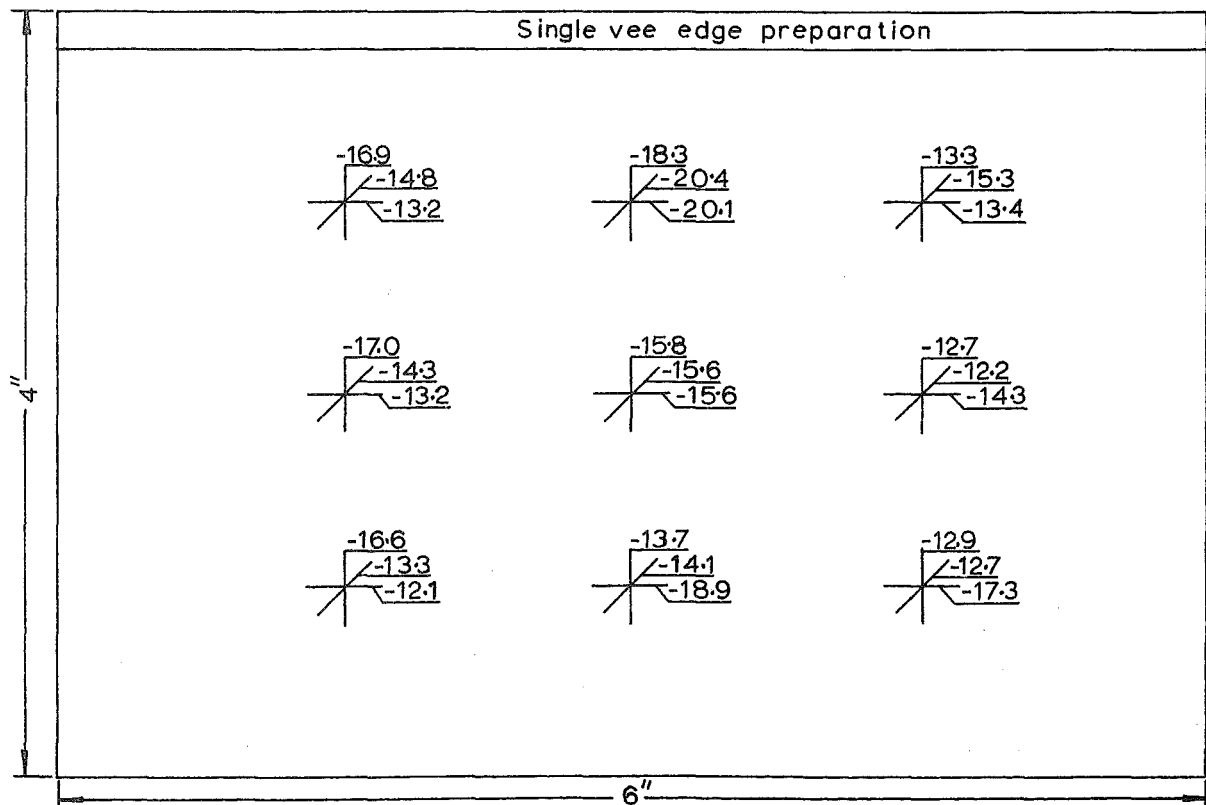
Initial stresses in recovery annealed parent plate before welding.(plate was part of specimen No.1)
